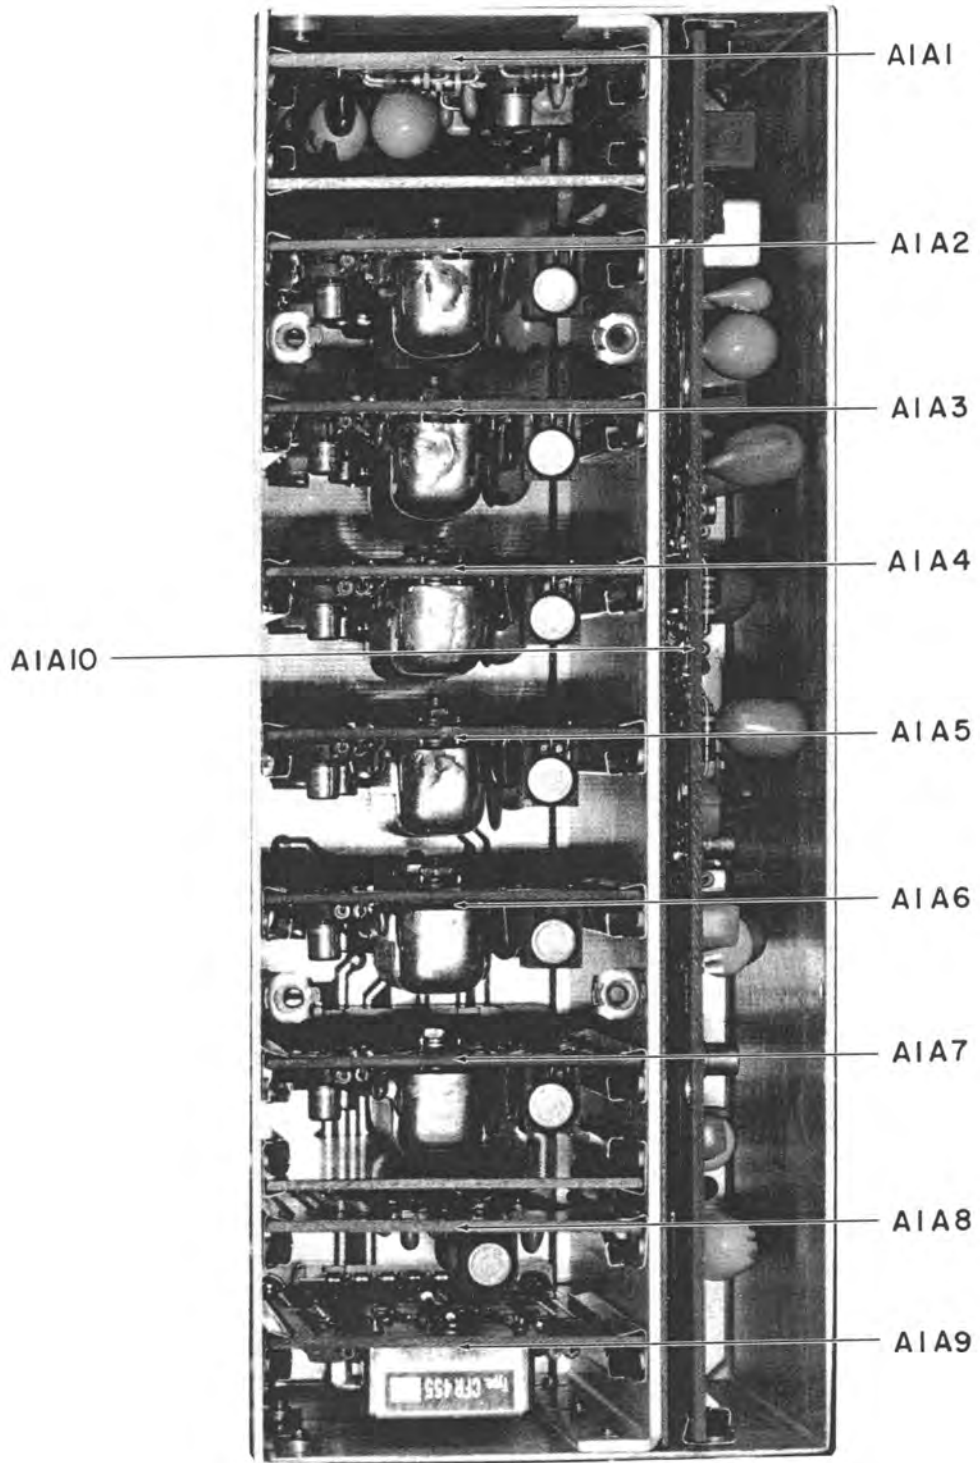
Type 796121 IF/Demodulator Assembly (A4), Location of Components
